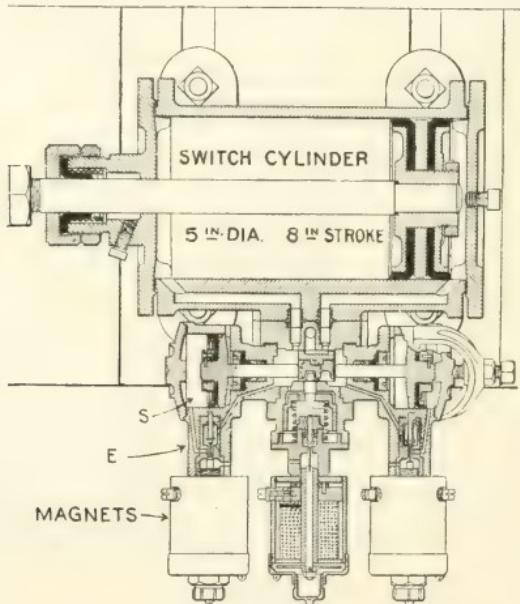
SECTIONAL VIEW OF CYLINDER AND VALVE
